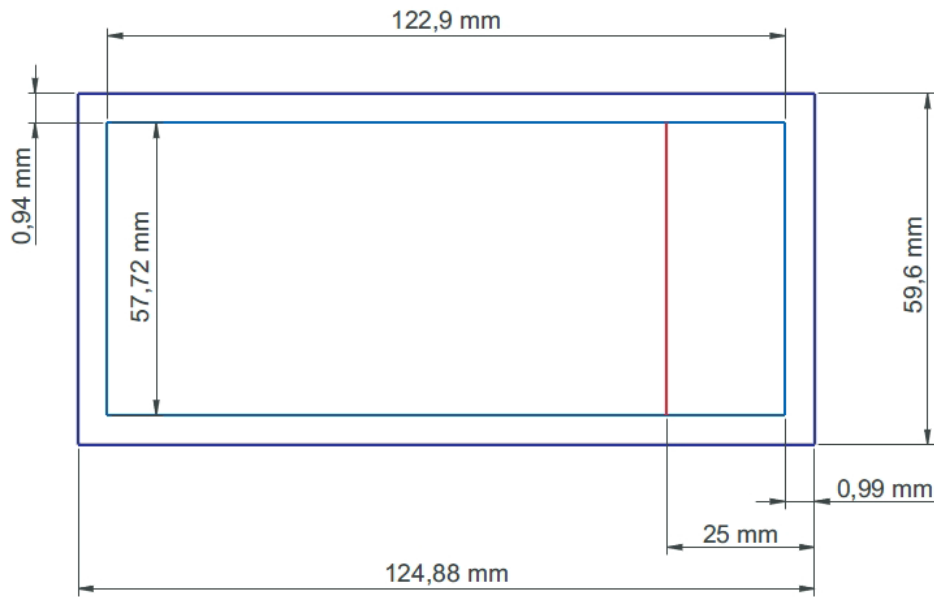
Geometrical dimensions of the rectangular sensors of layer 4-6. [7]
